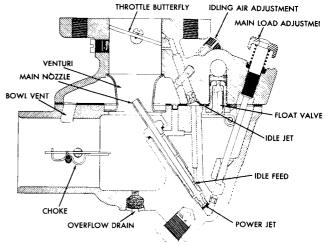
Sectional View of the Marvel-Schebler Carburetor
